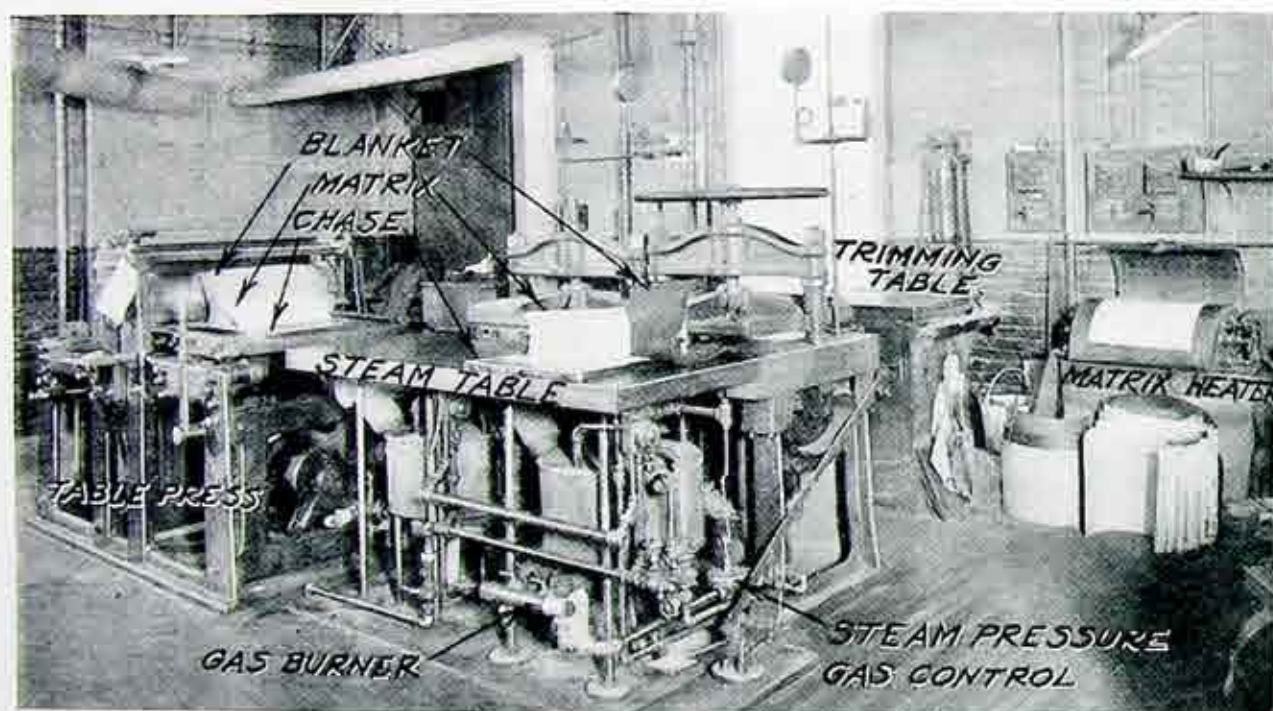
Picture of rolling machine, steam table and matrix heater, showing how impression is made and matrix is formed ready to be placed in the casting box.
